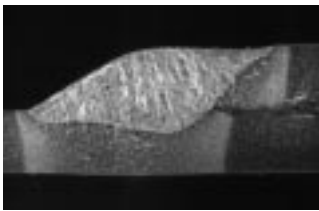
Overlap joint 2x2 mm plate thickness, welded with PZ6105R-1.4 mm at 150 cm/min.
